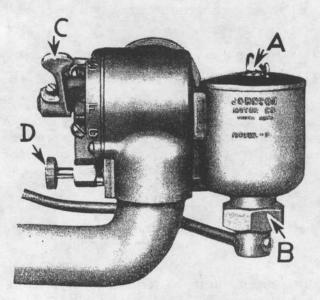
Front view of carburetor showing float pin, settling basin, gas throttle and needle valve.
